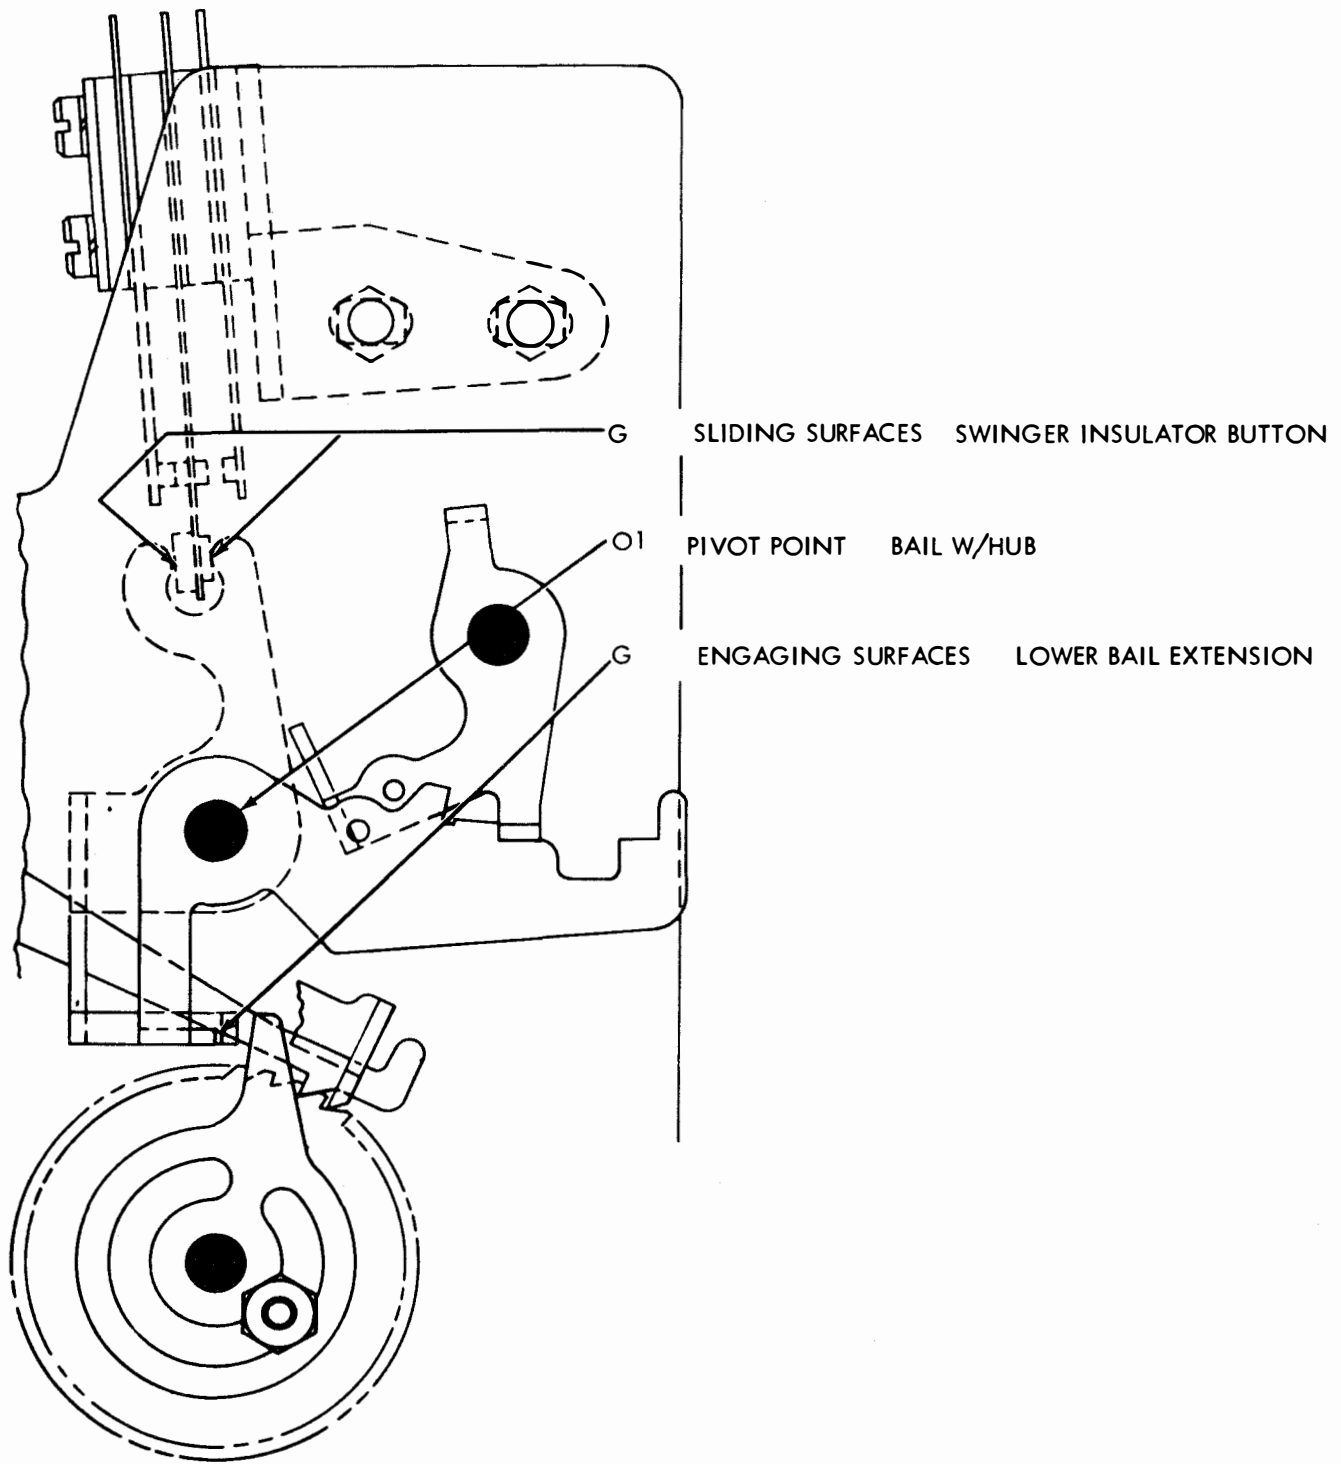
End of Tape Feed-Out Timing Contacts for Non-Interfering LTRS and BLANK Tape Feed-Out Mechanism
